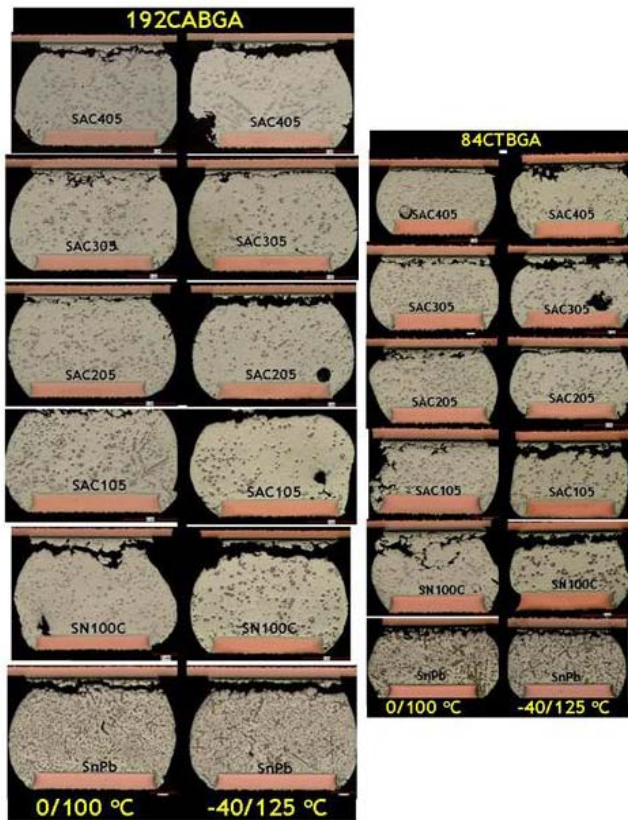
Thermal fatigue cracking in the 192CABGA and 84CTBGA solder joints assembled with the five Sn based Pb-free solders and the eutectic SnPb.
